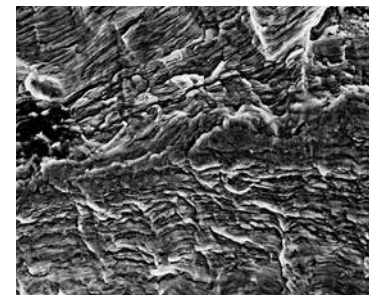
Fatigue fracture under the scanning electron microscope
